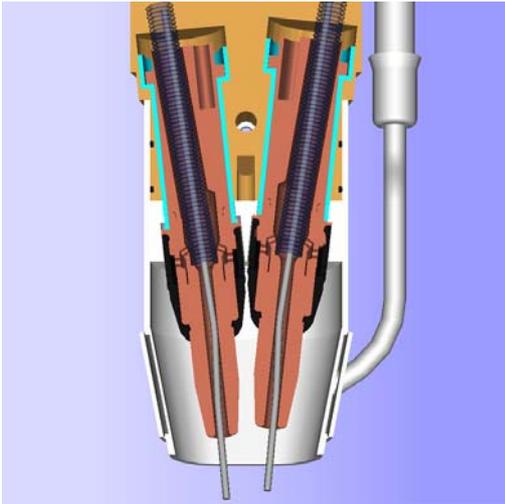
Detailed view of the welding torch for the tandem process TimeTwin. Here, the two contact tubes are electrically insulated from one another.
